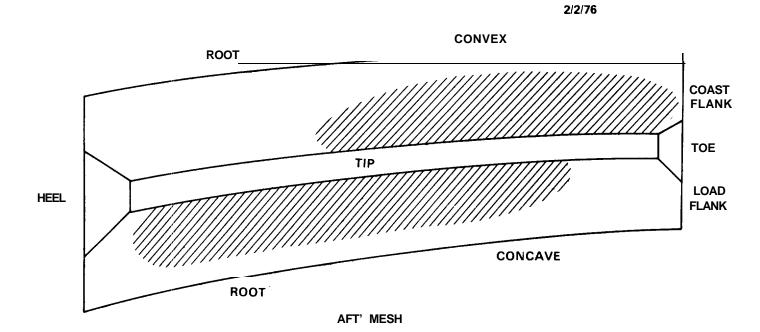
Tooth Contact Pattern: Starboard Lower Gear, at 192 Hours of Operation
